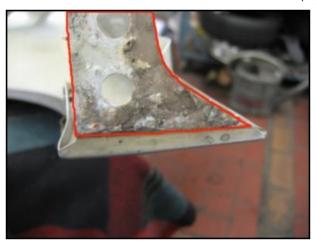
fender removed (corrosion on the contact surface of the fender)
